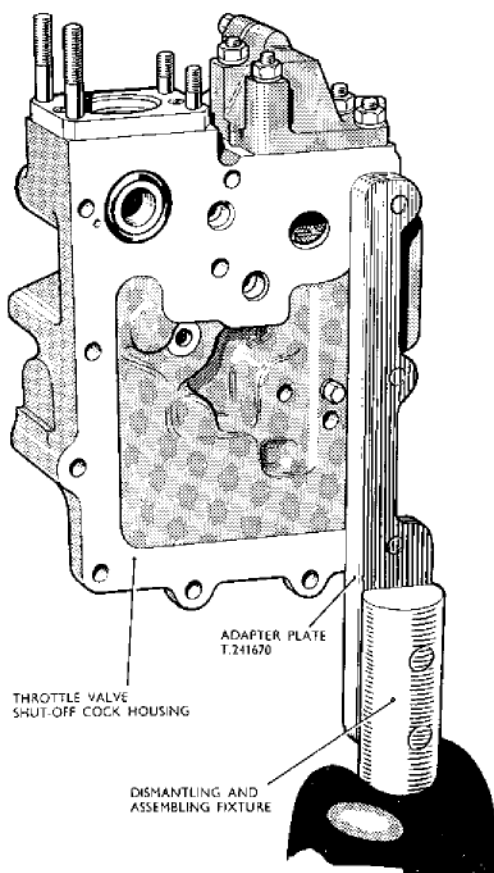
Dismantling and assembling fixture (Throttle valve/shut-off cock housing)
